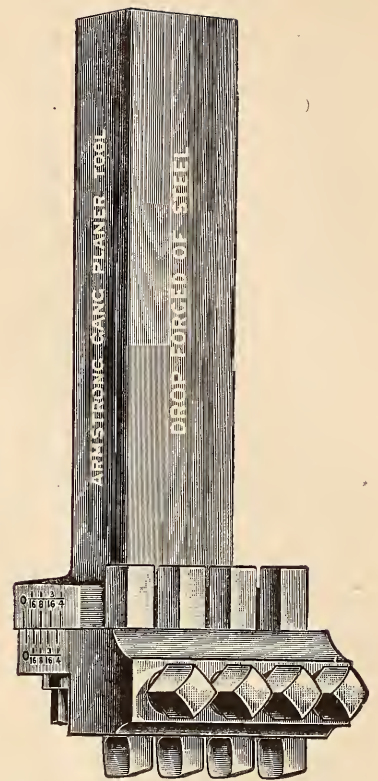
GANG PLANER TOOL—MANUFACTURED BY ARMSTRONG BROS. TOOL COMPANY, CHICAGO.
